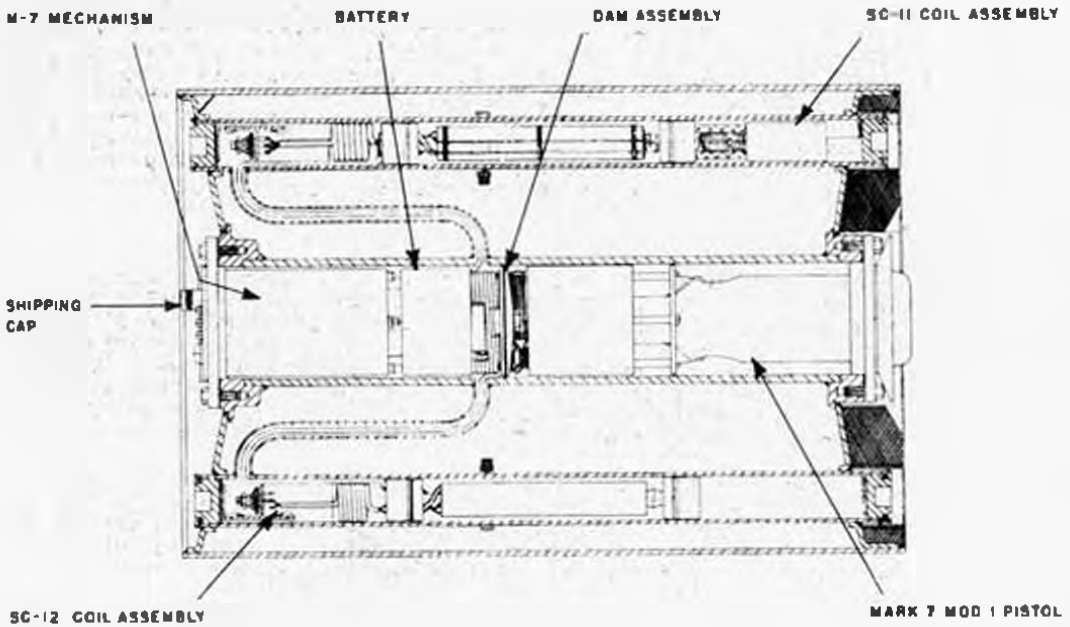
Mk. 8 Depth Charge, Sectional View
